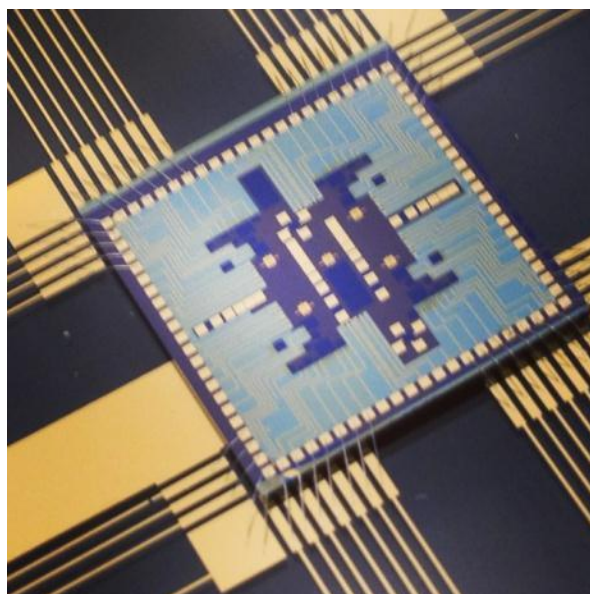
Completed 2nd generation chip mounted onto a glass PCB and wire-bonded.
